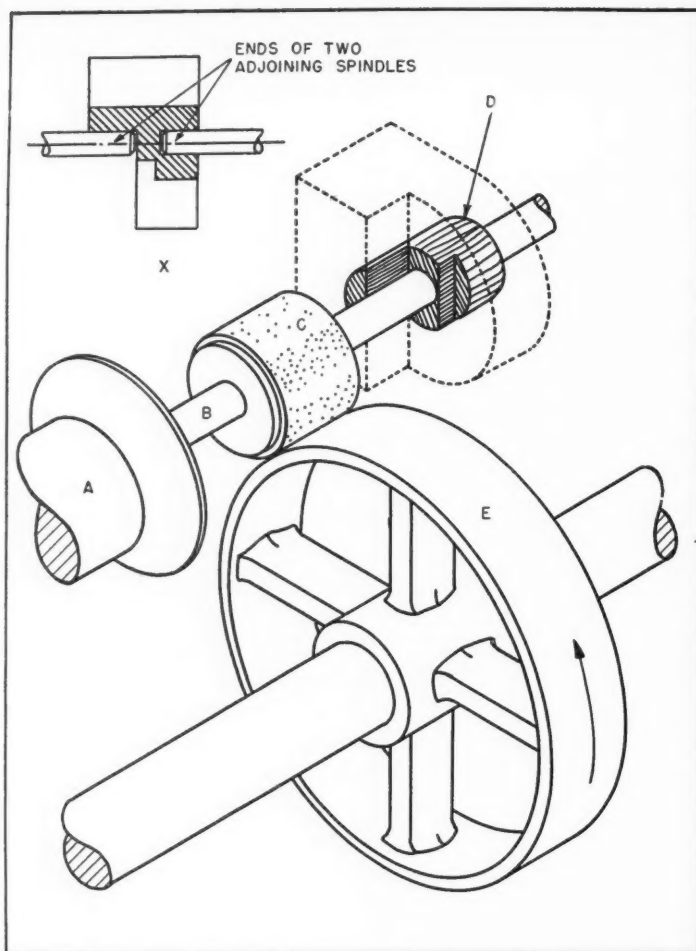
A special oilless wood bearing (D) permits quick replacement of bobbin (A) when it becomes filled, and prevents soiling of the yarn while the machine is in operation or when changing bobbins
